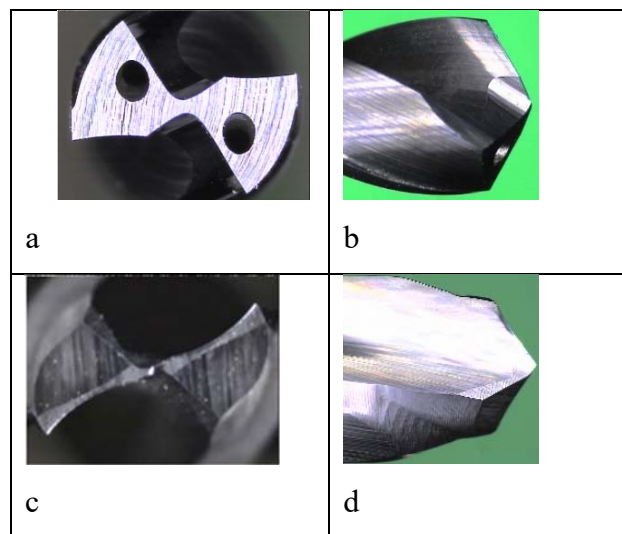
a) Traditional tool front view; b) Traditional tool side view; c) Innovative tool front view; d) Innovative tool side view.
